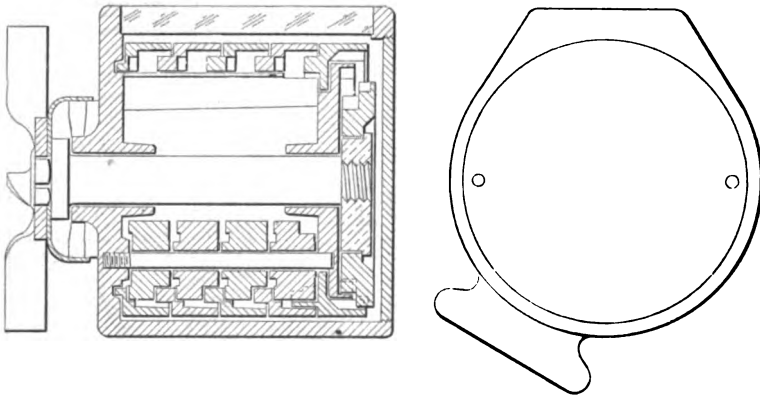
VEEDER CYCLOMETER WITH SECTION VIEW
